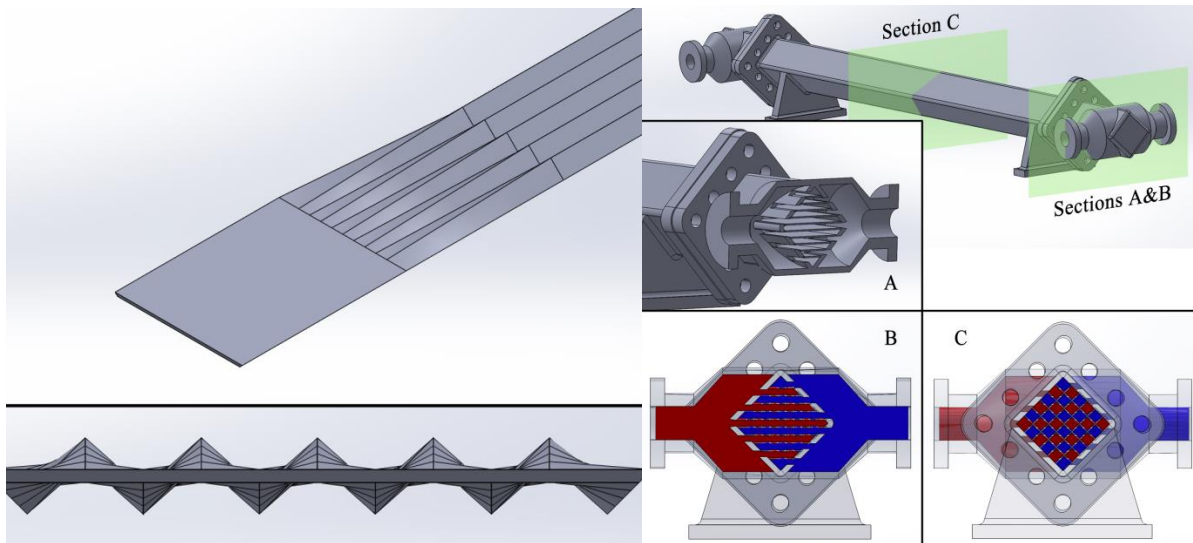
Example heat exchanger plate design, assembly, and manifold
